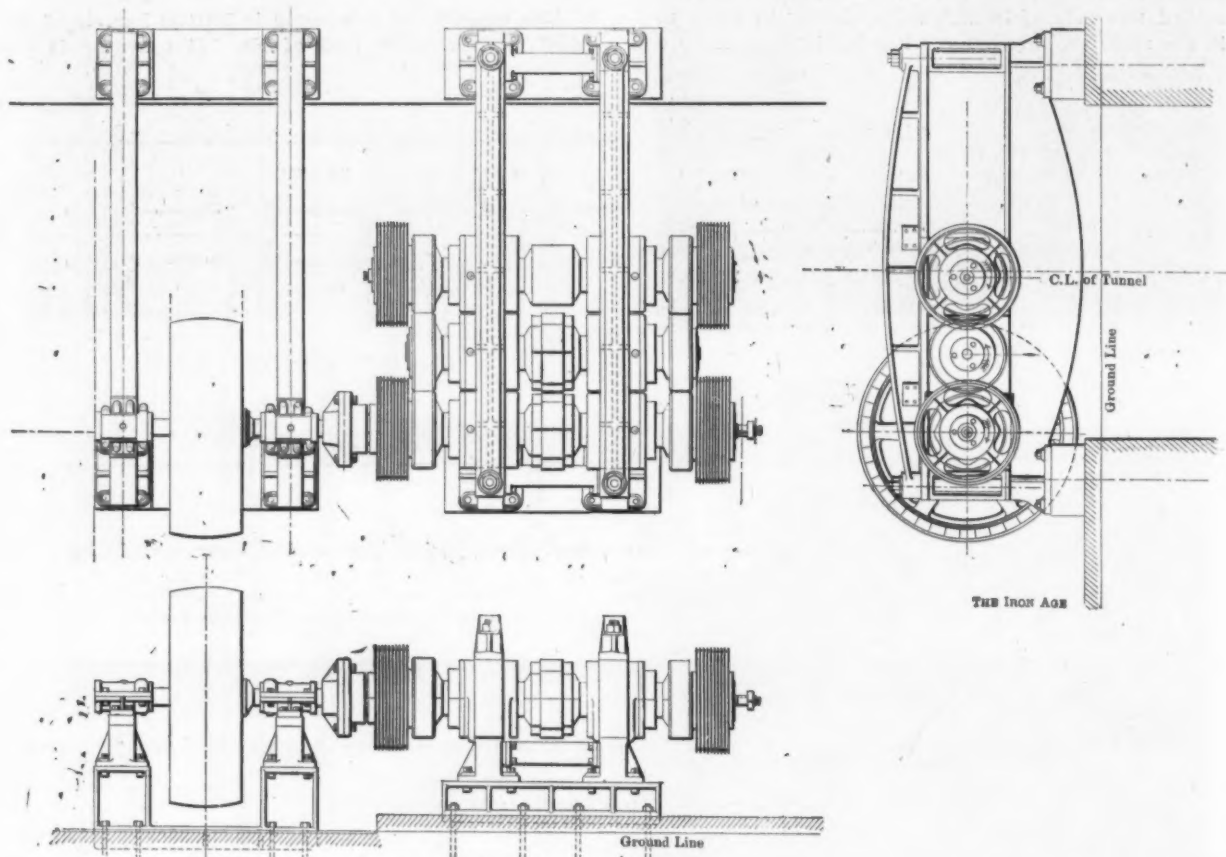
Plan and Elevations of Fine Grinding Rolls.
